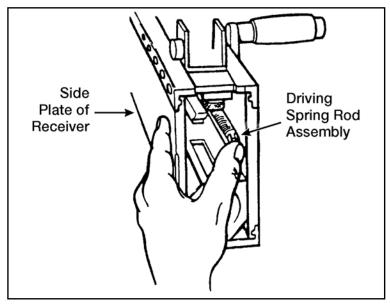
Installation of the driving spring rod assembly
